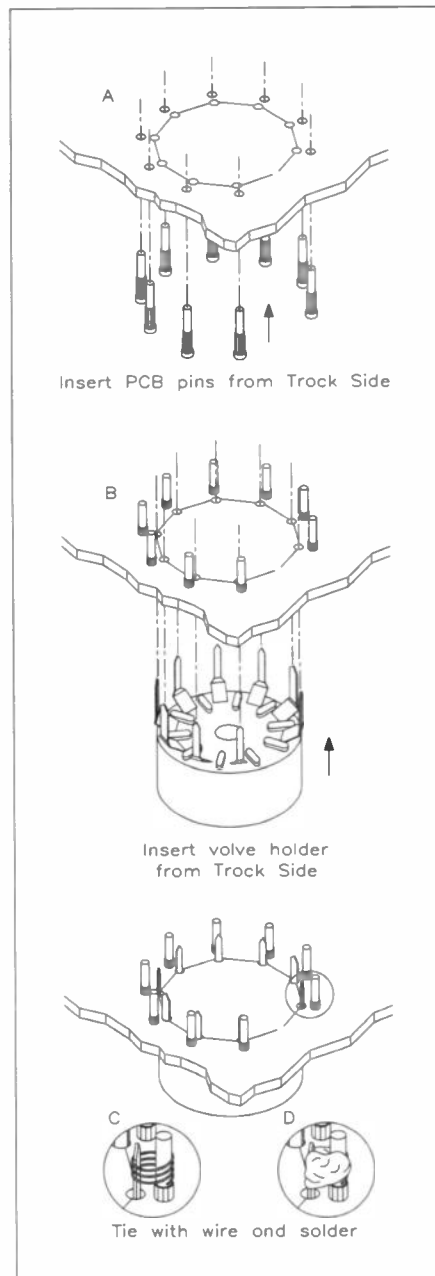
Mounting valve sockets for V1 & V2 to the PCB. (A), fitting the PCB pins; (B), inserting the socket; (C), joining each connection with wire; (D), final soldered joint.
